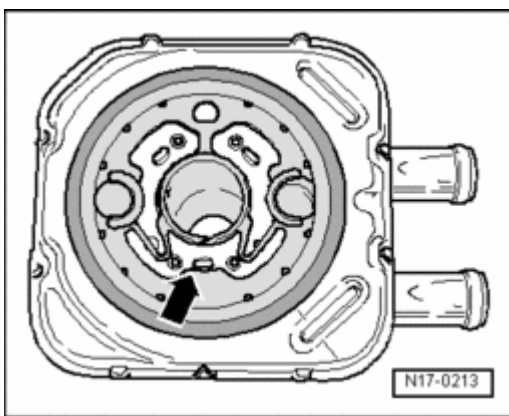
Installed Position Of Oil Seal And Plastic Element In Oil Cooler
